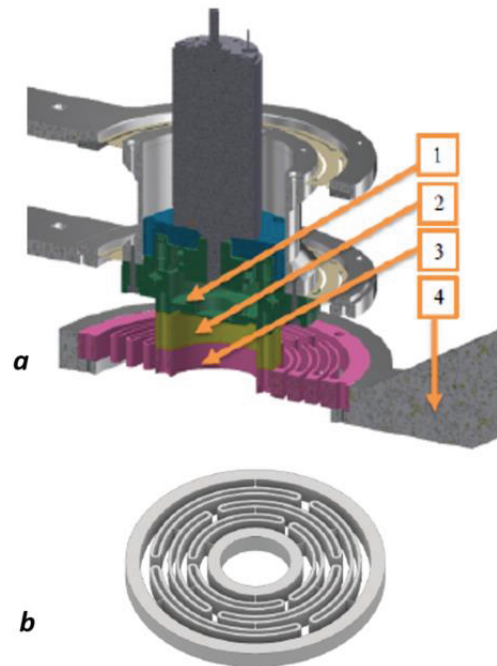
a – CAD model of the flexible joint; b – CAD model of the compliant component; 1 – gear; 2 – sleeve; 3 – compliant component; 4 – connector
